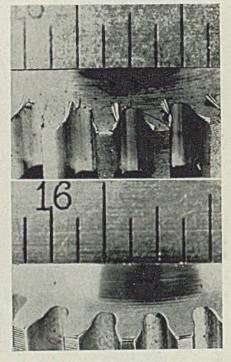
Small spur gear sections greatly enlarged. Above are shown nicks and burrs before brushing. Note how these have been removed in lower view, sharp edges being rounded off smoothly
